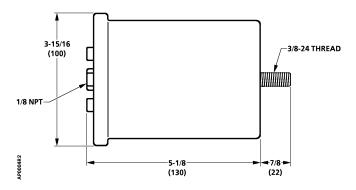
No. 3 Pneumatic Damper Actuator Dimensions. Dimensions are in Inches (Millimeters).
